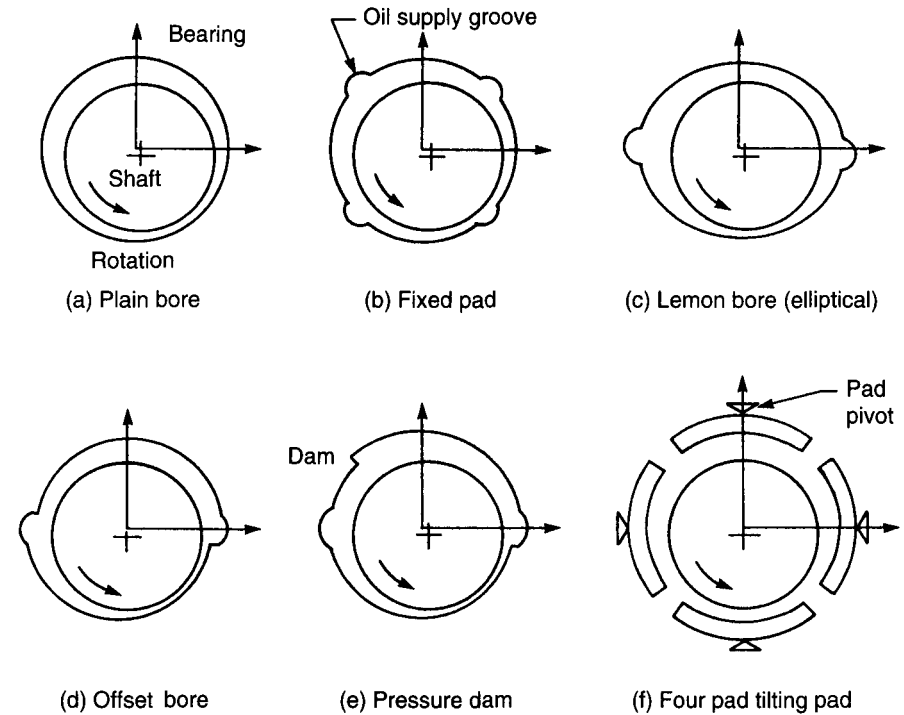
Different styles of journal bearings. From *Fundamentals of Design Fluid Film Bearings*. S. M. Rhode, C. J. Maday, and P. E. Allaire, eds. (1979). Courtesy American Society of Mechanical Engineers.
